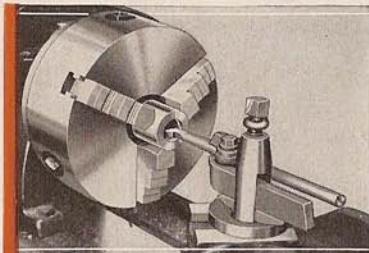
Boring the Hole in Bushing after it has been Drilled.
